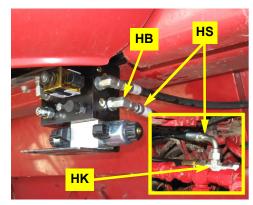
with inset: Tank hose installed at steering block and (inset) at return oil manifold
